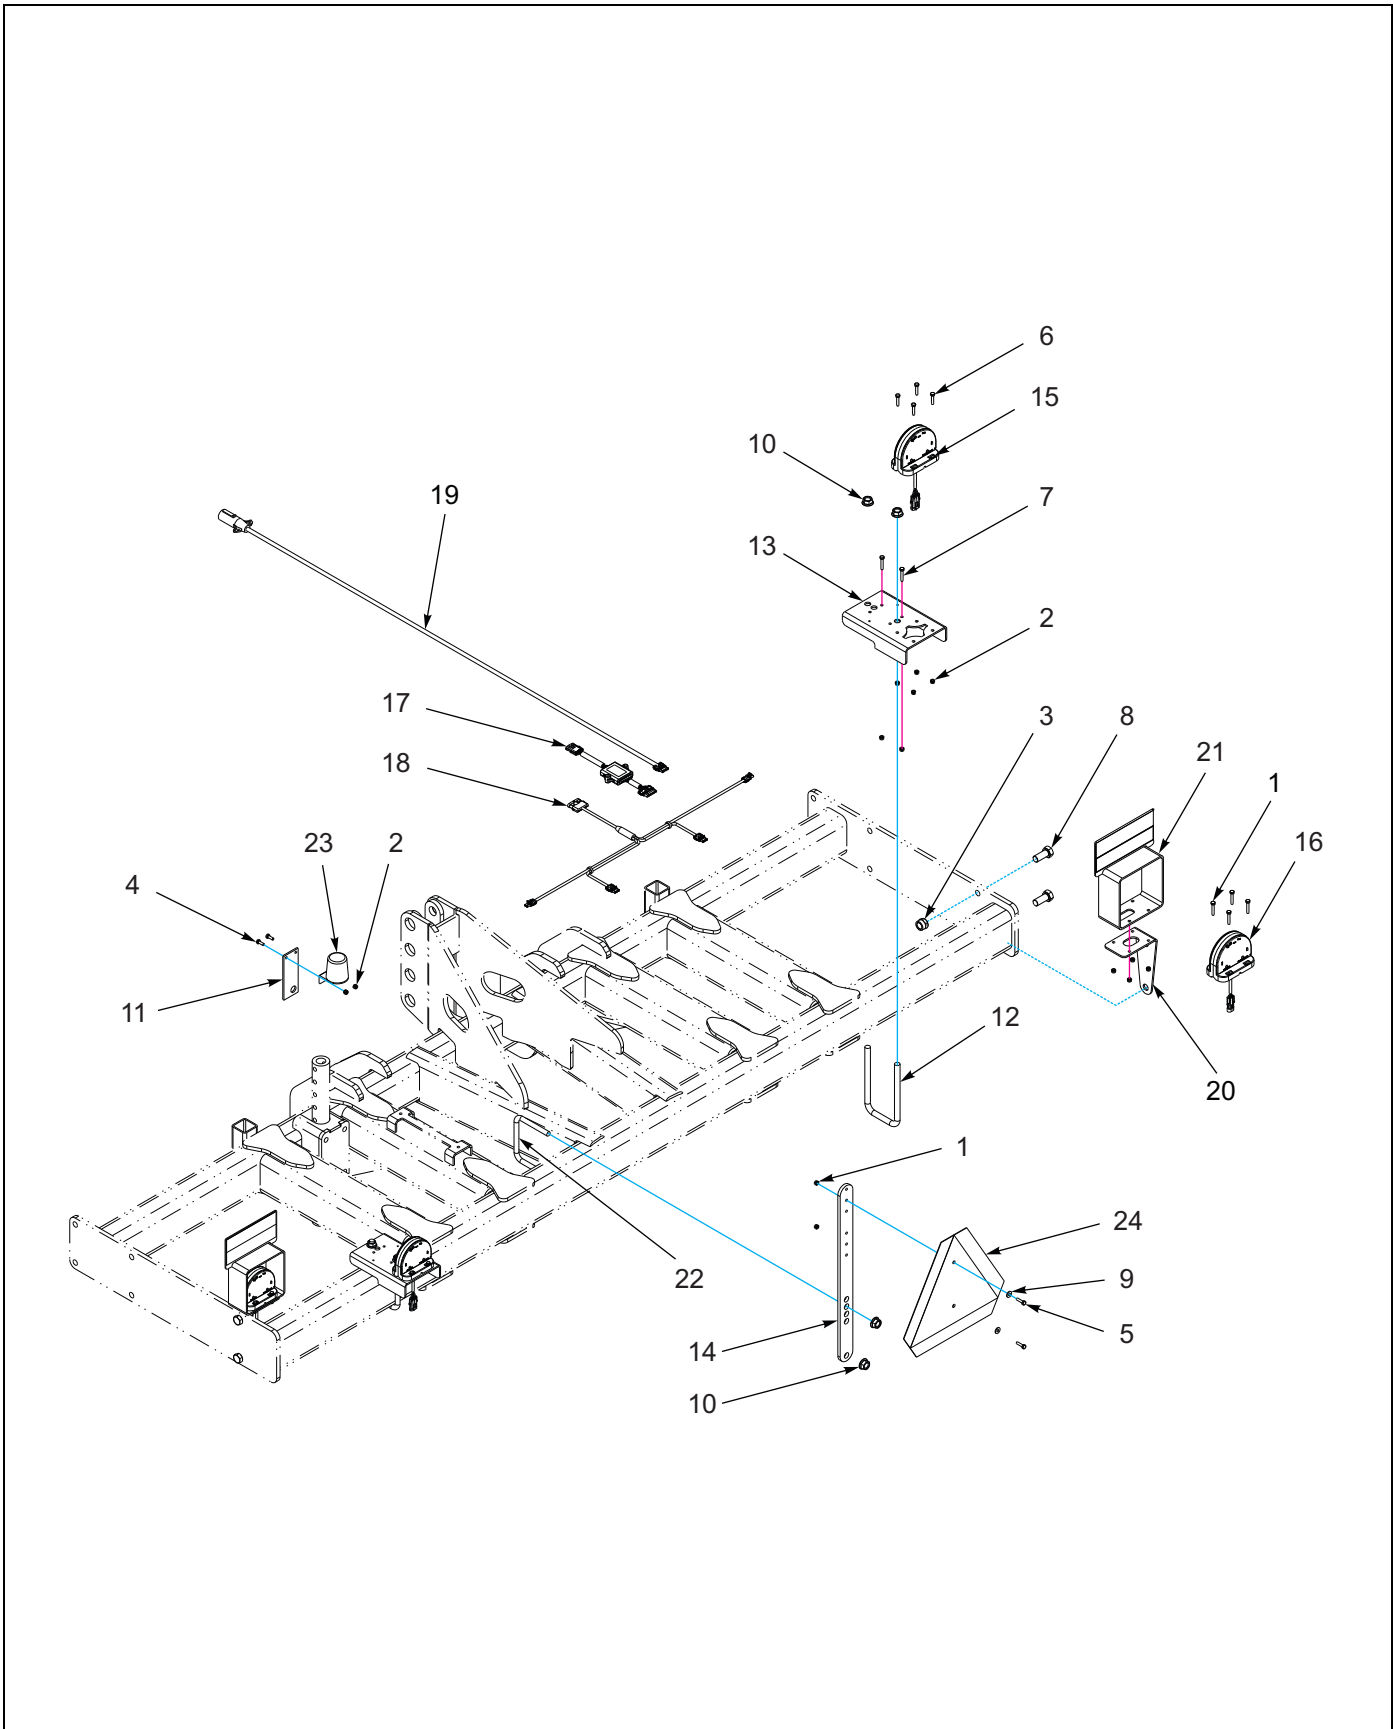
Electrical Assembly - Standard 4 & 5 Shank
